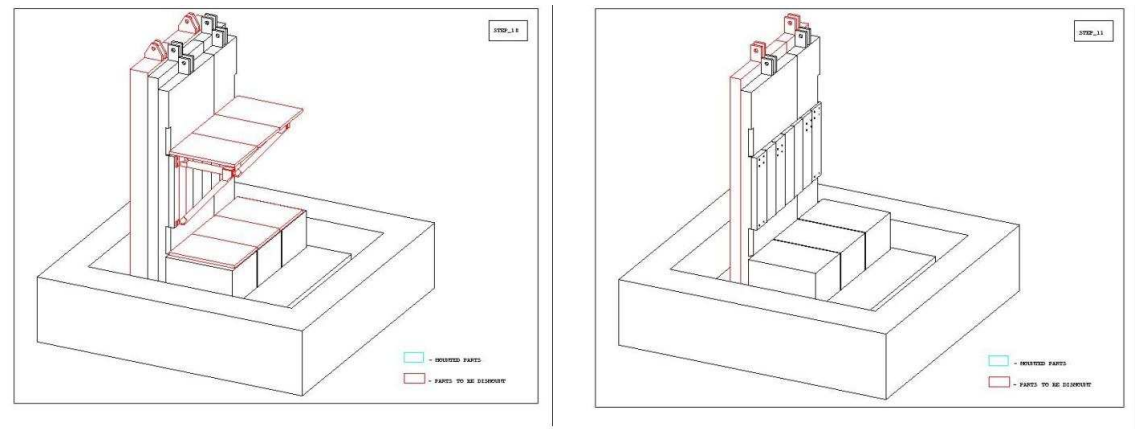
SM3 Analysis Magnet disassembly steps 11 (left) and 12 (right)
